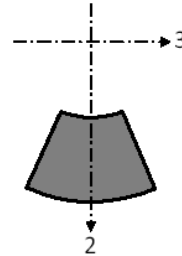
Definition of Manufactured Curvature for tilting pad bearings
